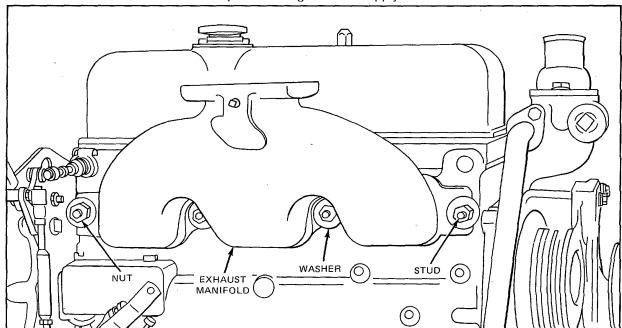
Typical Air-Cooled Exhaust Manifold (Square Flange) Mounting
